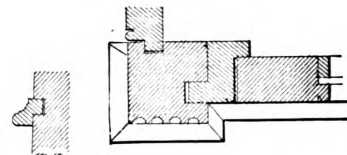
Plan View of a Front Angle of the Cabinet. Fig. 6.—Section Showing Manner of Putting on the Molding.
